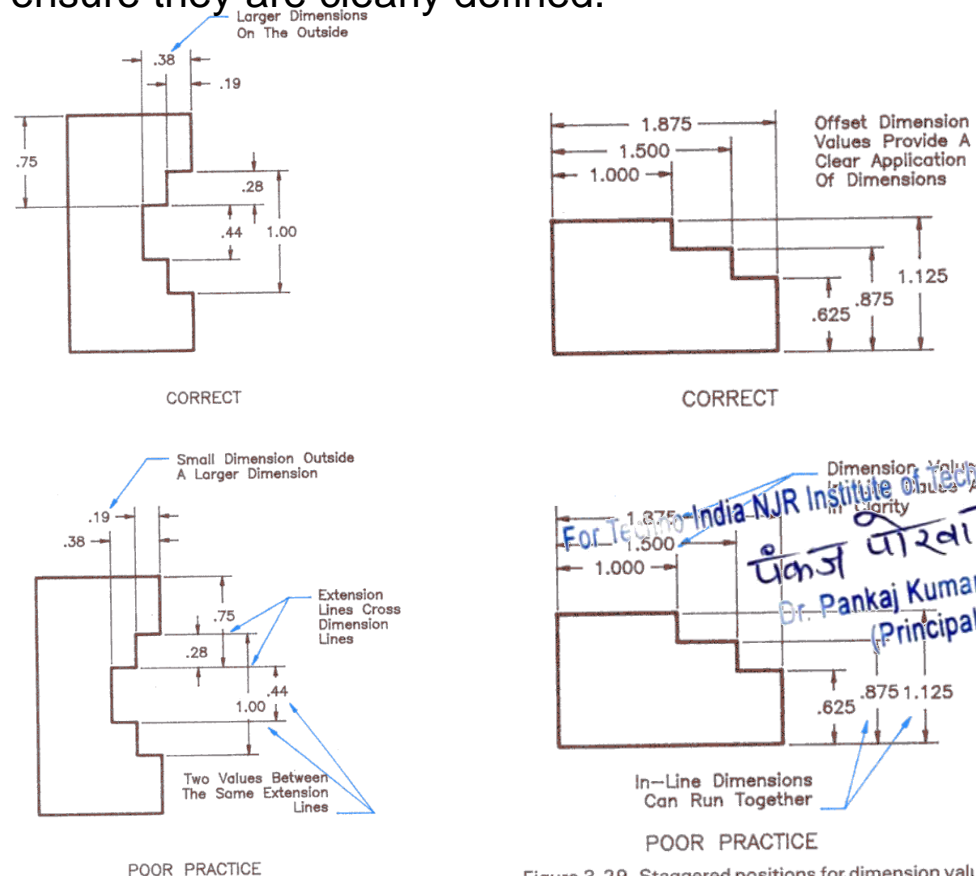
Dimensions are arranged to avoid crossing dimension and extension lines. This normally requires that the large dimensions be placed outside smaller ones.
